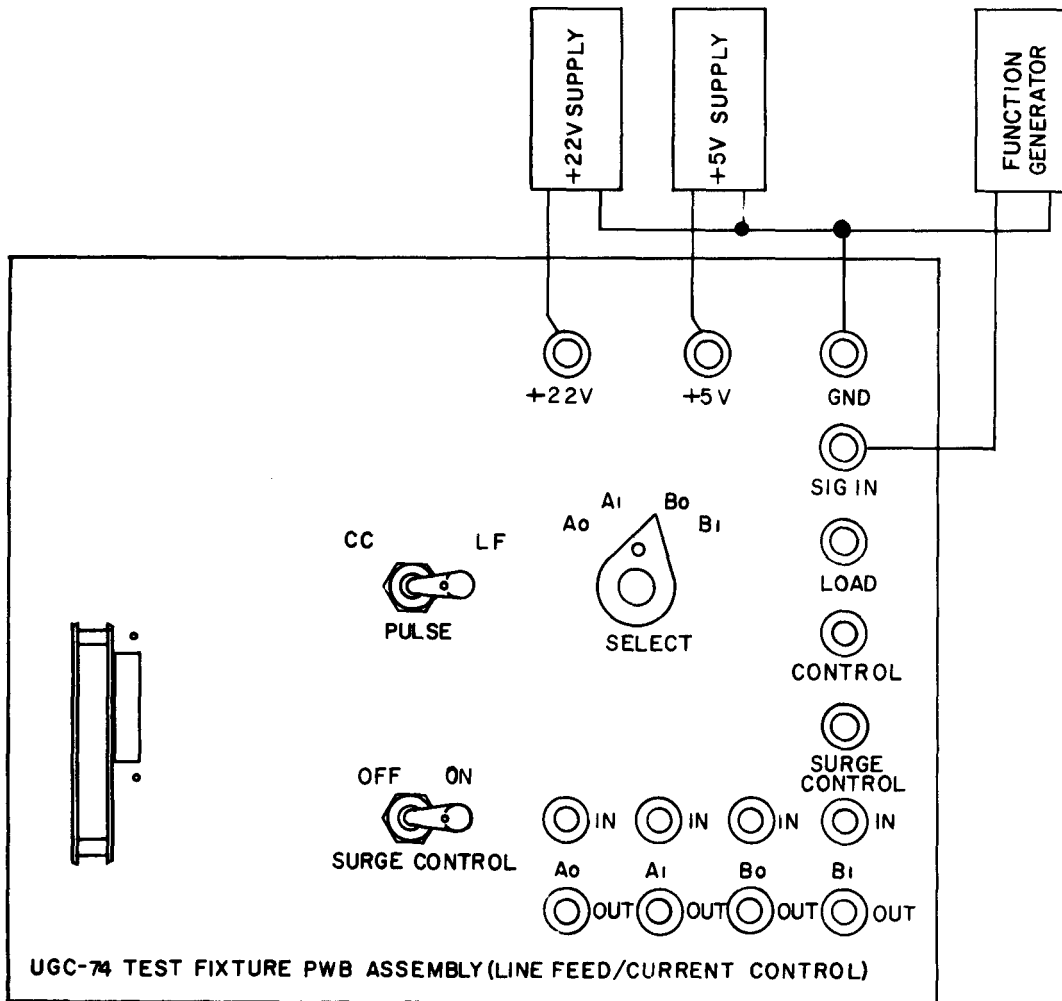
MOTOR DRIVE AND CURRENT CONTROL BOARD ASSEMBLY TEST SETUP.
